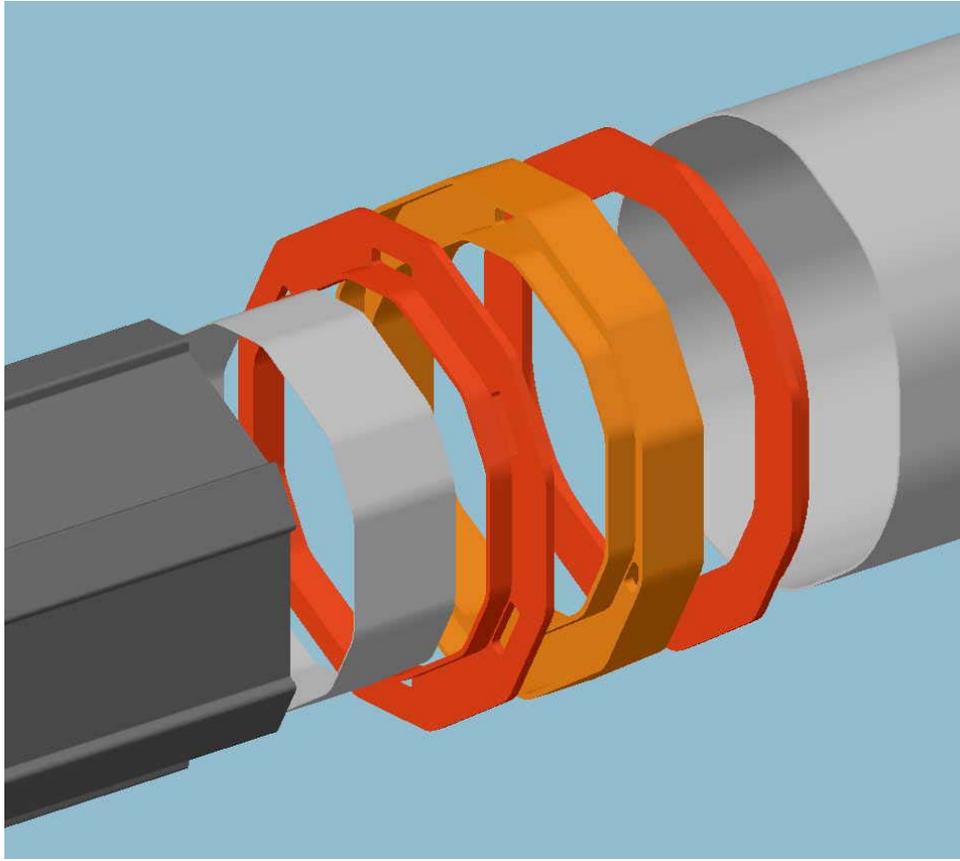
Exploded view showing details of the coolant bulkhead/manifold.
